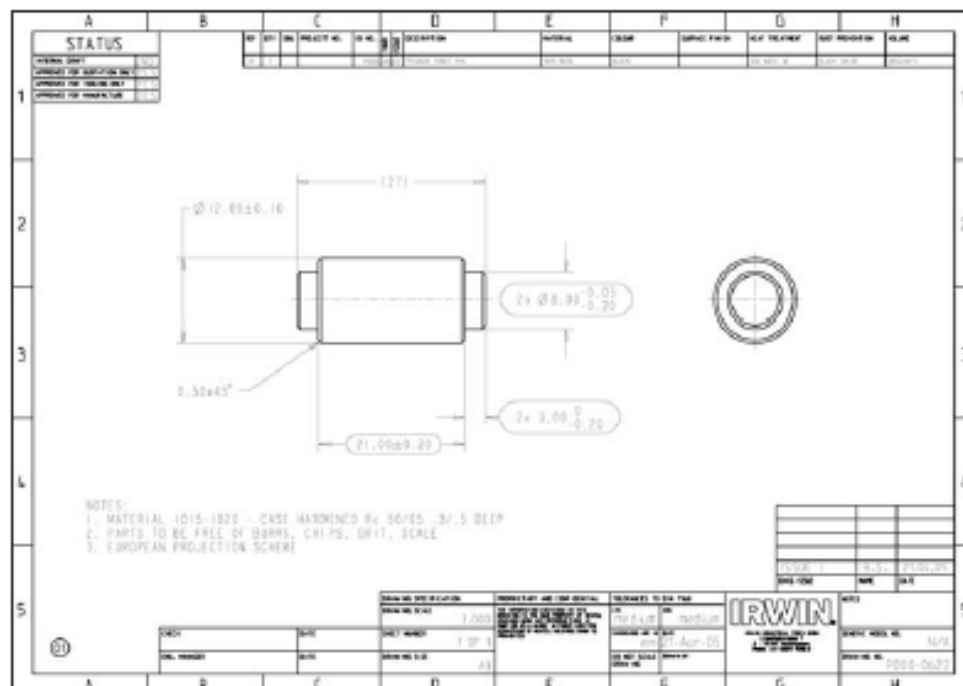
Typical detail drawing. (Reprinted with permission of Irwin Industrial Tools.)
